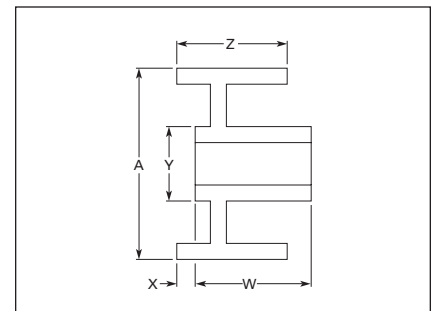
Standard Brake Wheels — Approximate Dimensions
